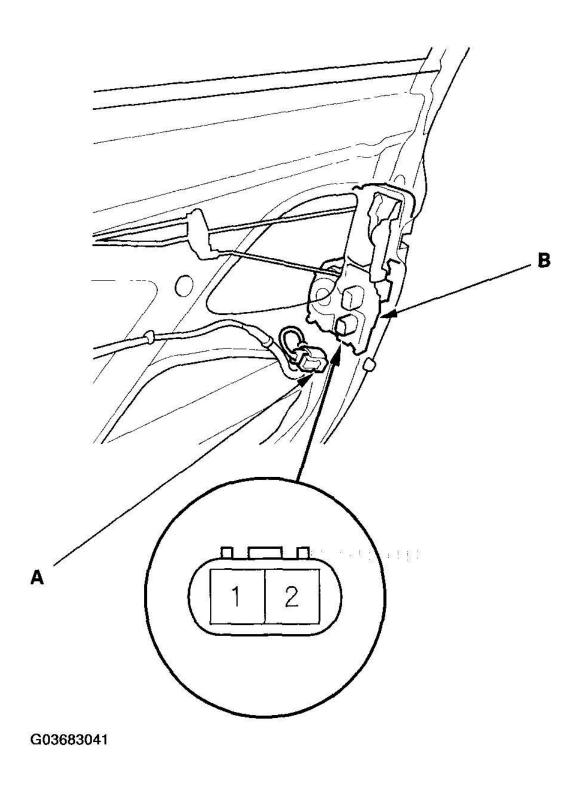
Disconnecting 2P Connector From Actuator Courtesy of AMERICAN HONDA MOTOR CO., INC.
